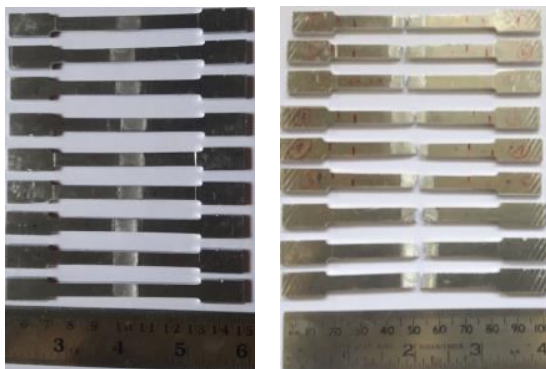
Tensile Testing Specimen (a and b) before and after weld joints
